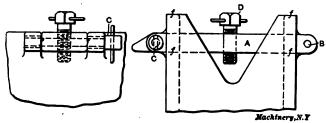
Common Designs of Leaf in Drill Jigs. Screw D Clamps the Work
